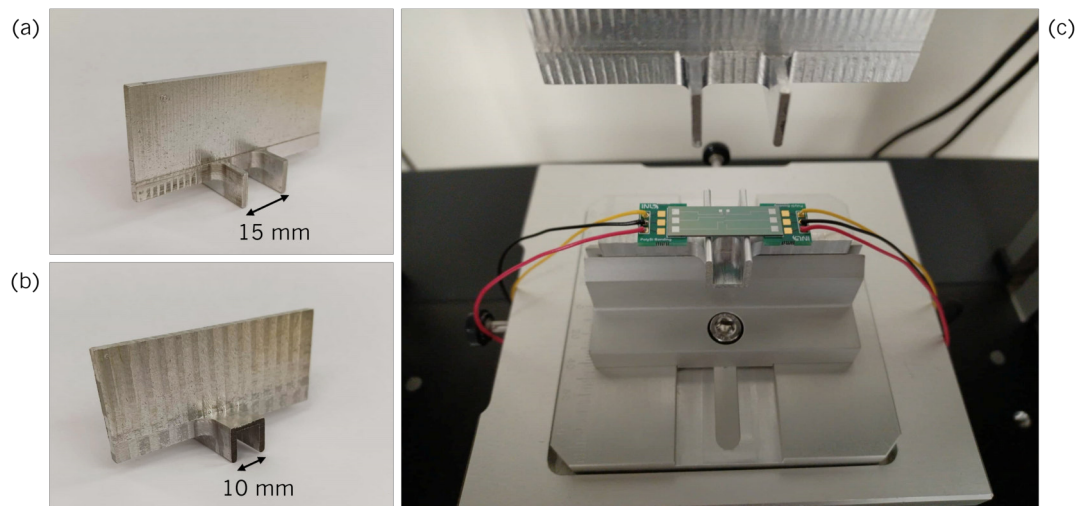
Machined pieces for the (a) load beams and (b) support beams; (c) Positioning of the device in the setup.
